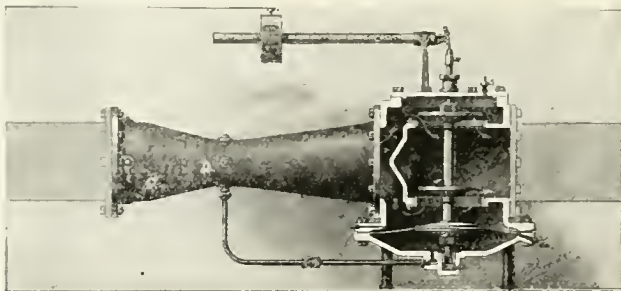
SECTIONAL VIEW OF THE SIMPLEX MAXIMUM DEMAND CONTROLLER.
